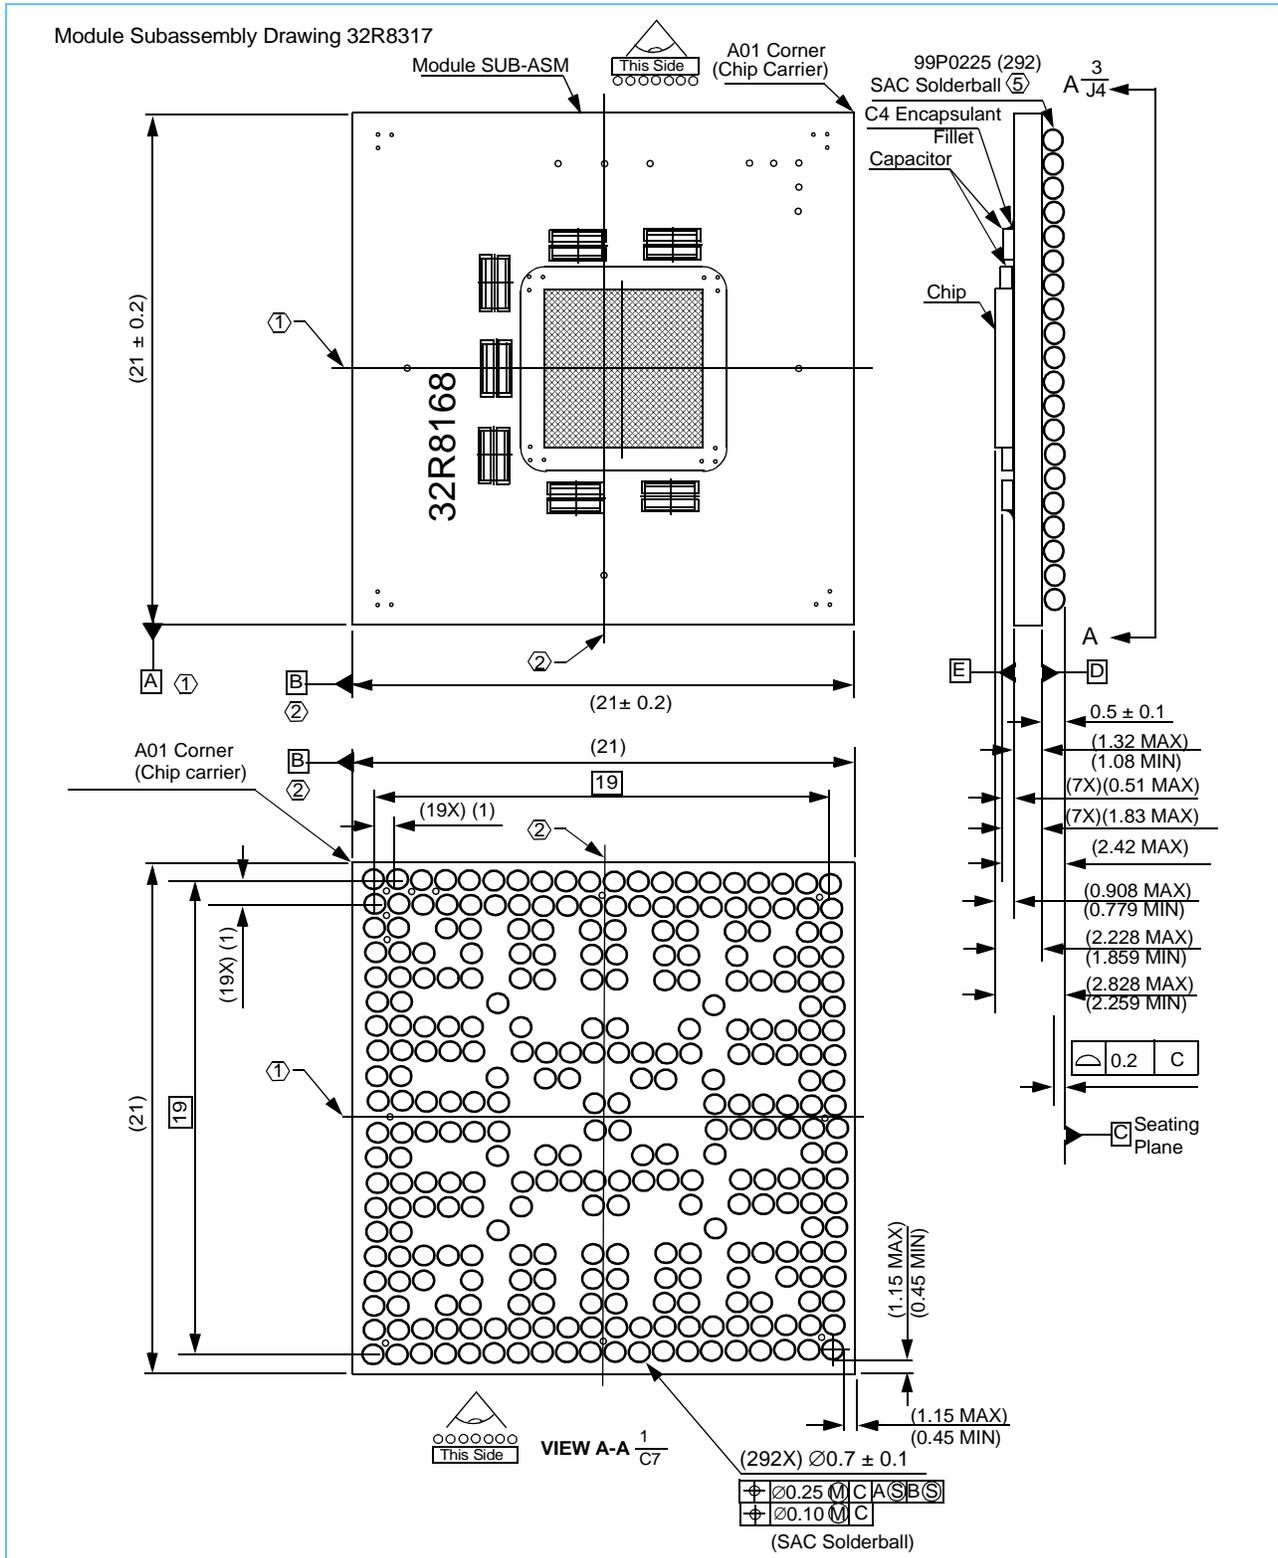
Mechanical Dimensions, Standard (Leaded) Package(Continued)
